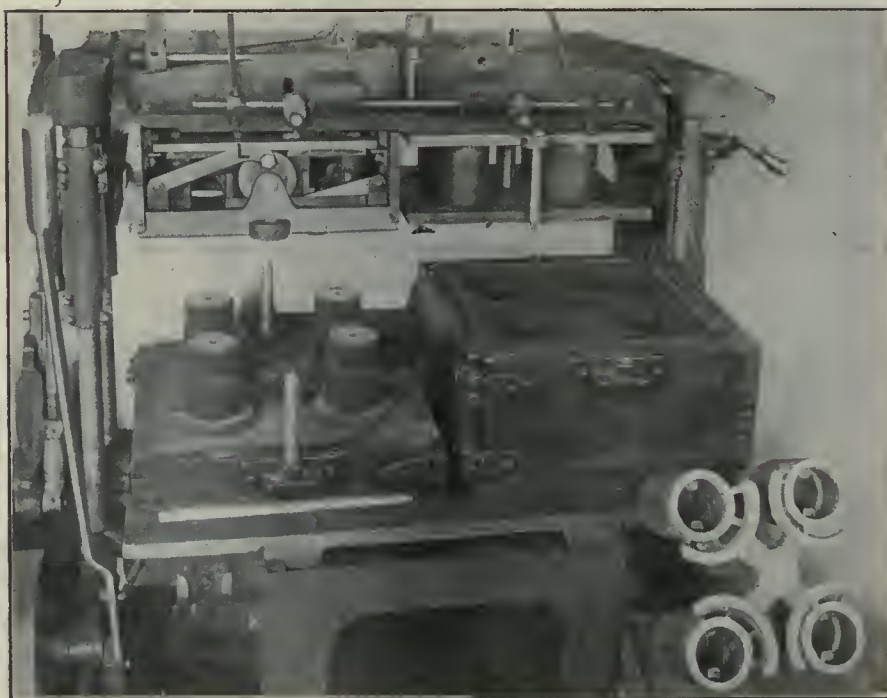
ARCADE PISTON MOLDING MACHINE WITH PATTERN DRAWN.
